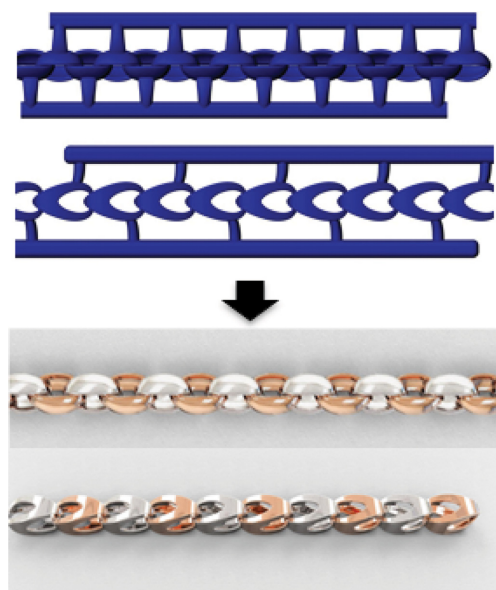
Prototype: Dissimilar metal jewellery using a 3D printer.
